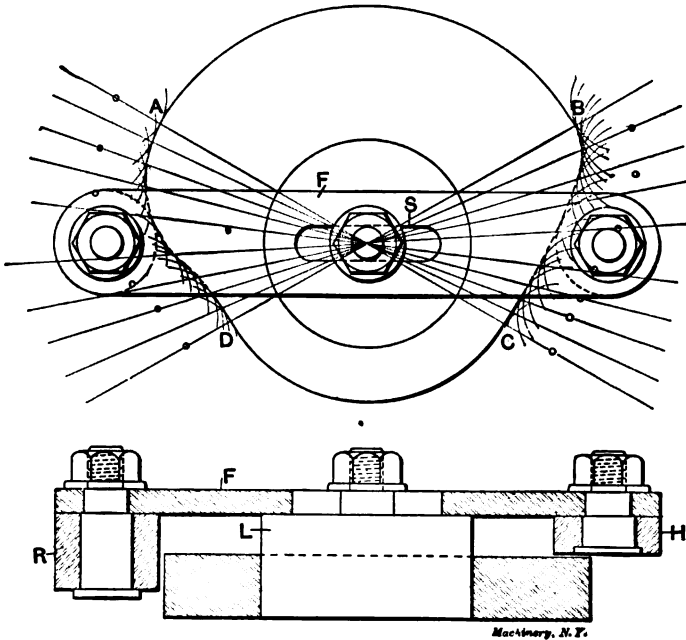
Device for Correctly Laying Out Cams for Cam-Actuated Press
